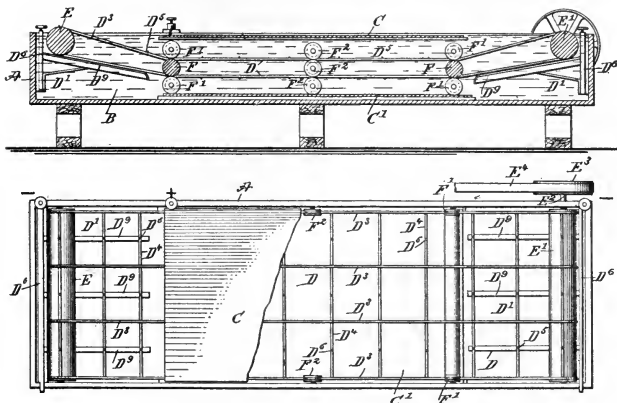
PLAN OF SCHULTE WIRE GALVANIZING MACHINE
